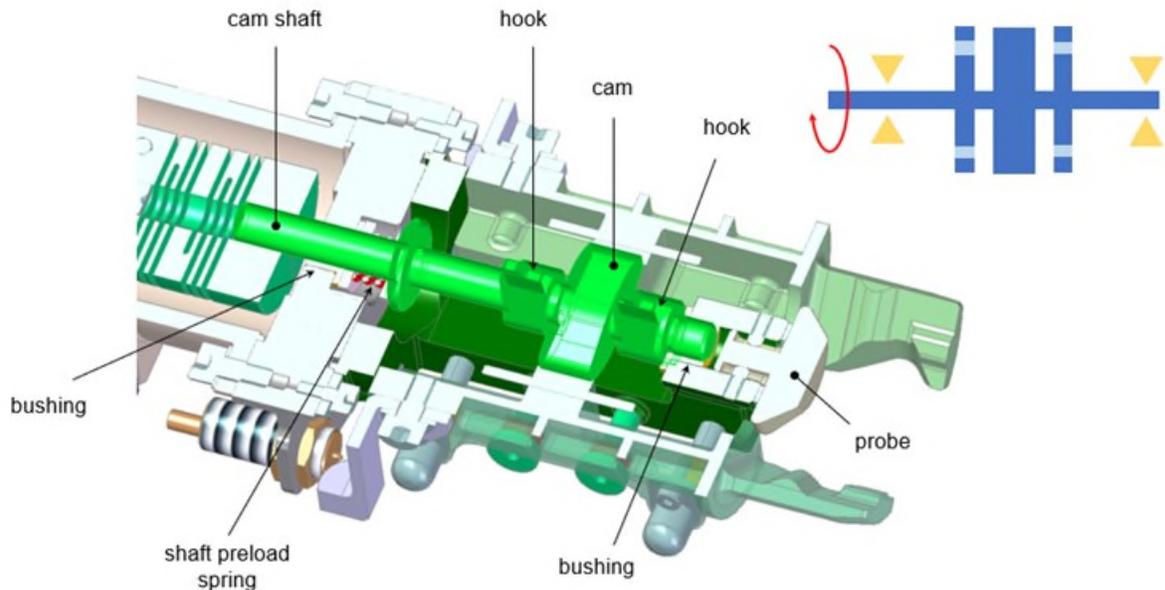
Gripper Cross Section and Cam Shaft Detail.
